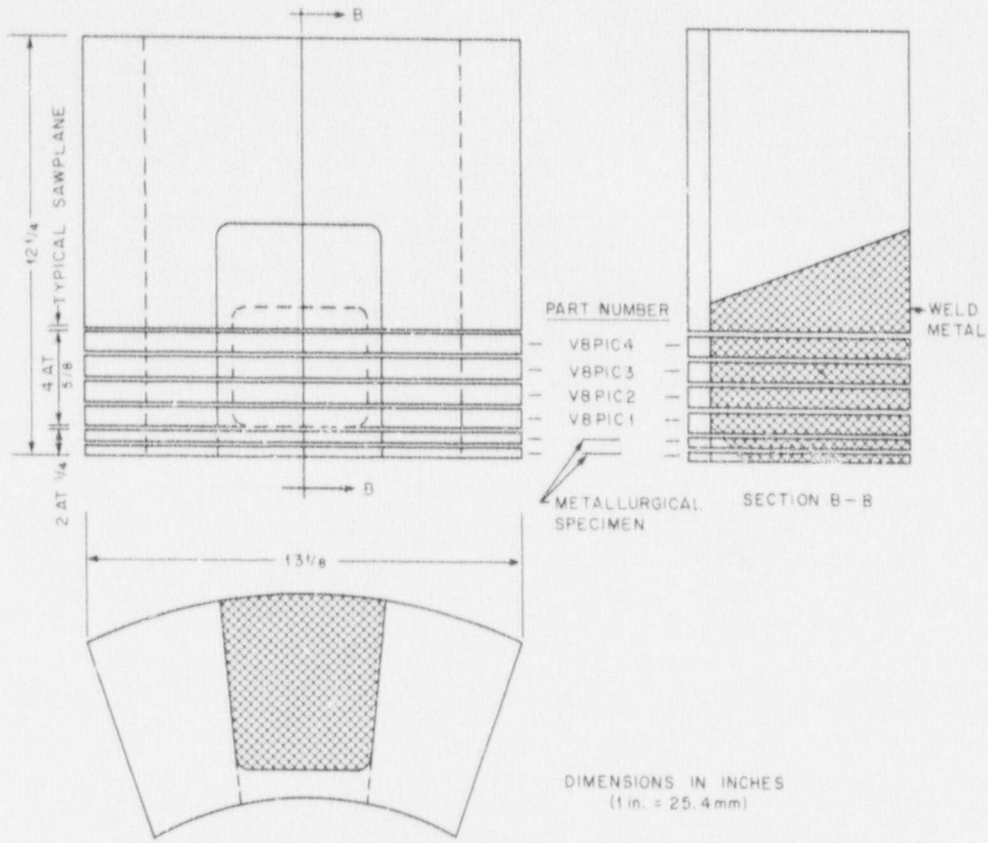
Cutting plan for part V8PIC of the V-7B prototypical repair weldment.
